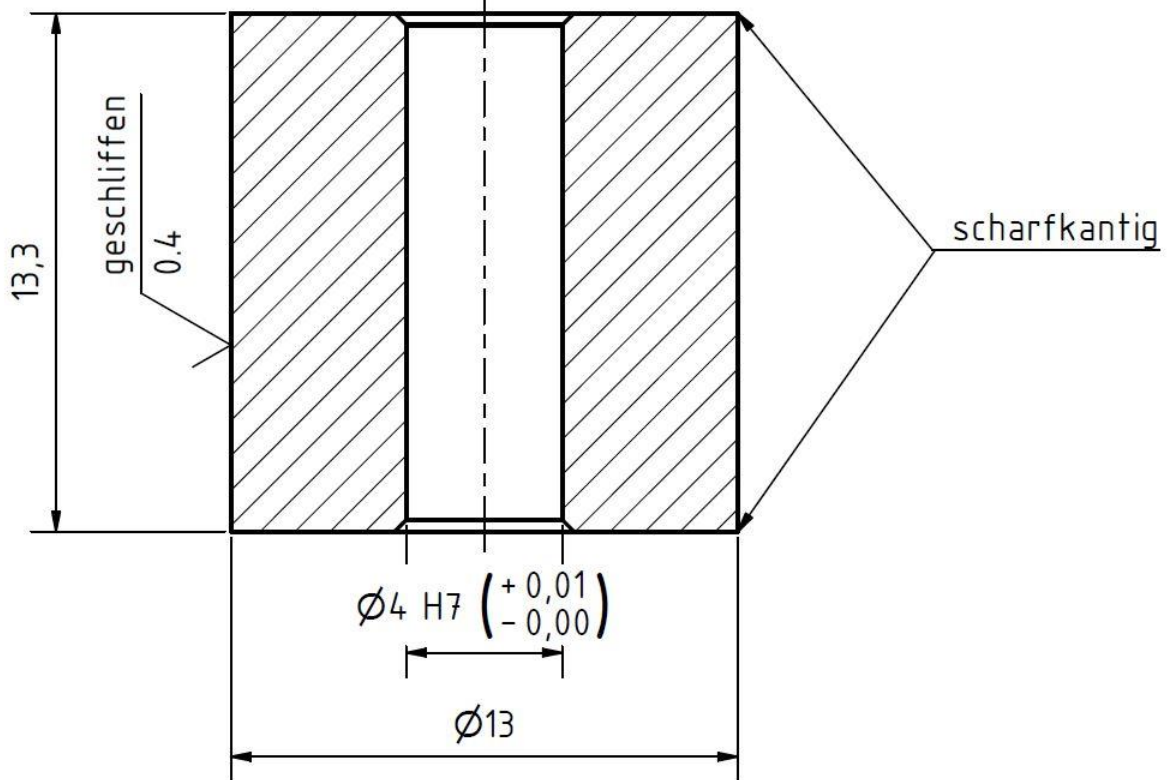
Blueprint of the used cylinder specimen with dimensions and tolerances.
